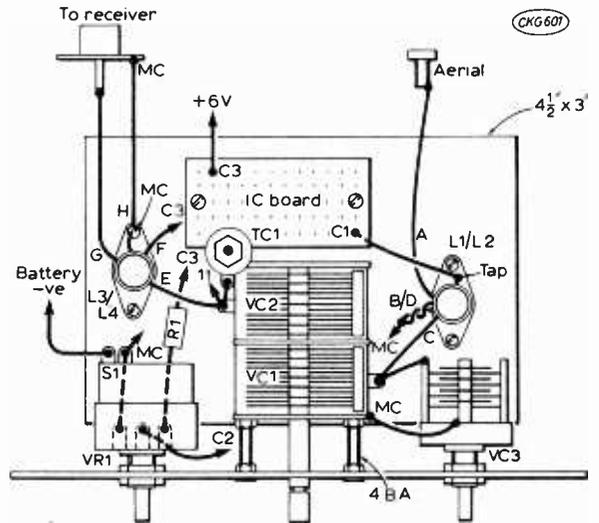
Top view of the chassis showing position of the IC board and major components.
